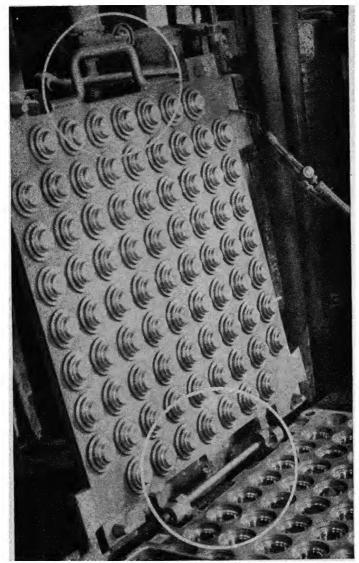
A multiple-cavity rubber mold showing rugged hinge (bottom circle) and handle (top circle) that facilitate handling, speed production, and increase safety. For large, heavy molds, a handle that is an integral part of the plate is preferable to one attached by welding.
